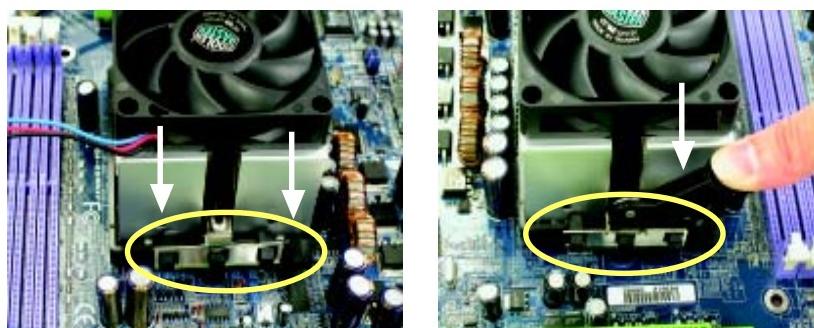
&6 Alignment of Heatsink Assembly with Standoffs
